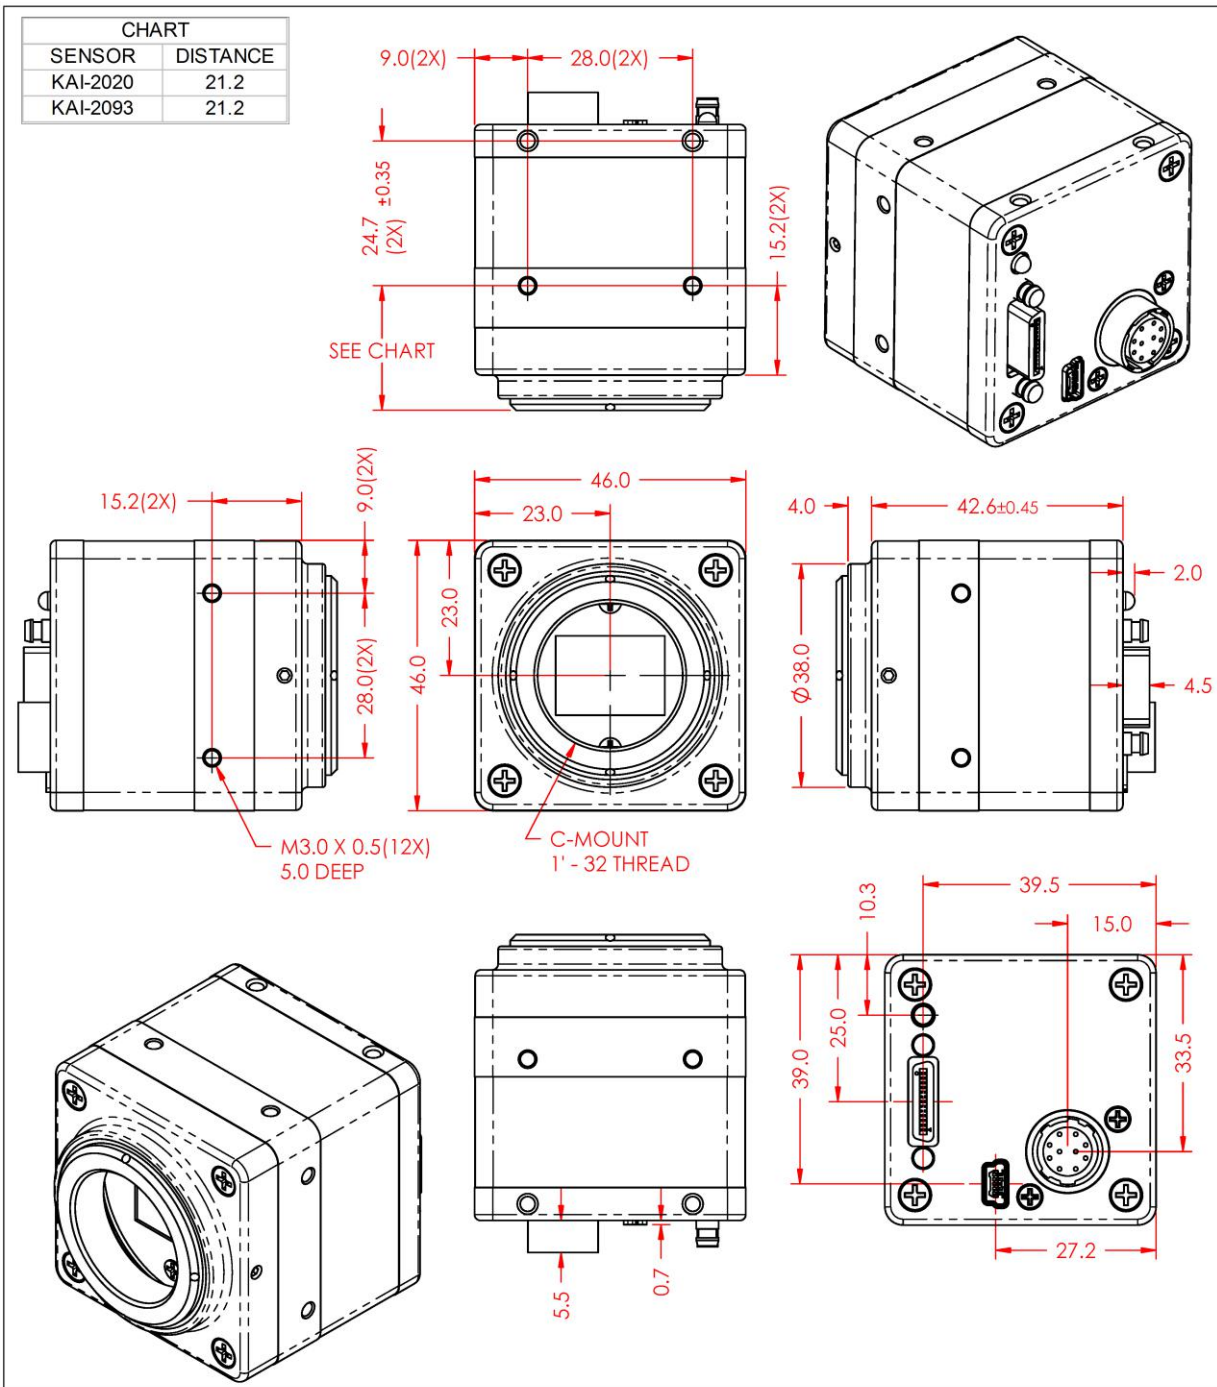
C-mount camera link output – dimensional drawings for ICL-B1620 and ICL-B1920.
